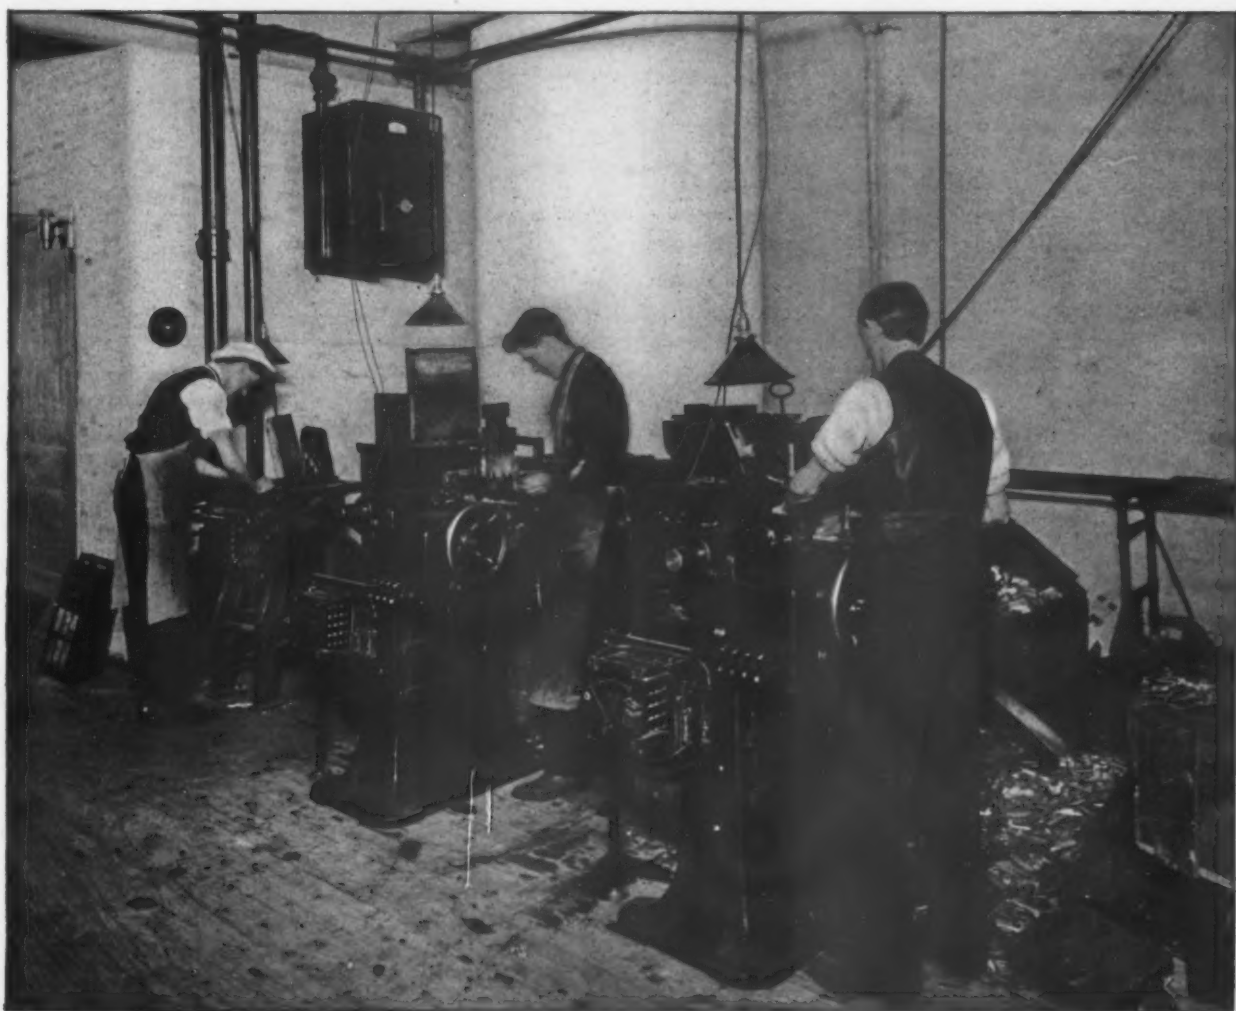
The Automatic Sorts Casting Machines, Used for Manufacturing Display Type.
